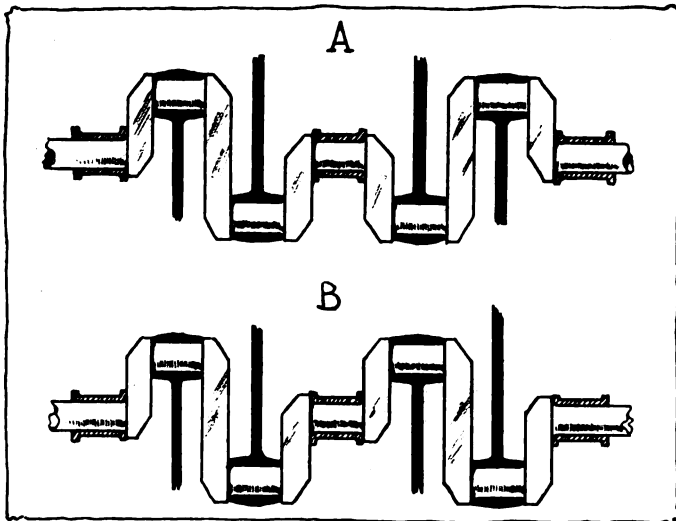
Two types of crankshaft suggested for four-cylinder opposed motor
